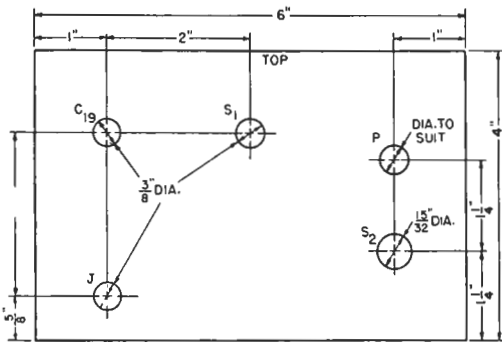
Layout dimensions for the front of the Signal Slicer. The dimension on the left which is blank should be $1 \frac{1}{8}$ inches. Note also that the holes for C_{19} and S_1 are not shown in true perspective, because they are actually closer to the bottom of the panel than the hole for the panel light. The dimensions shown are correct.
